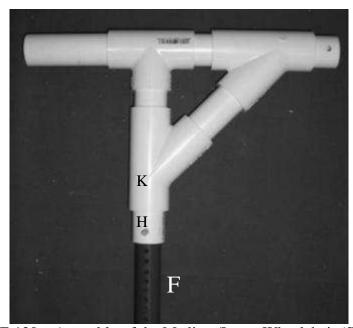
Assembly of the Medium/Large Wheelchair (Step 12).
